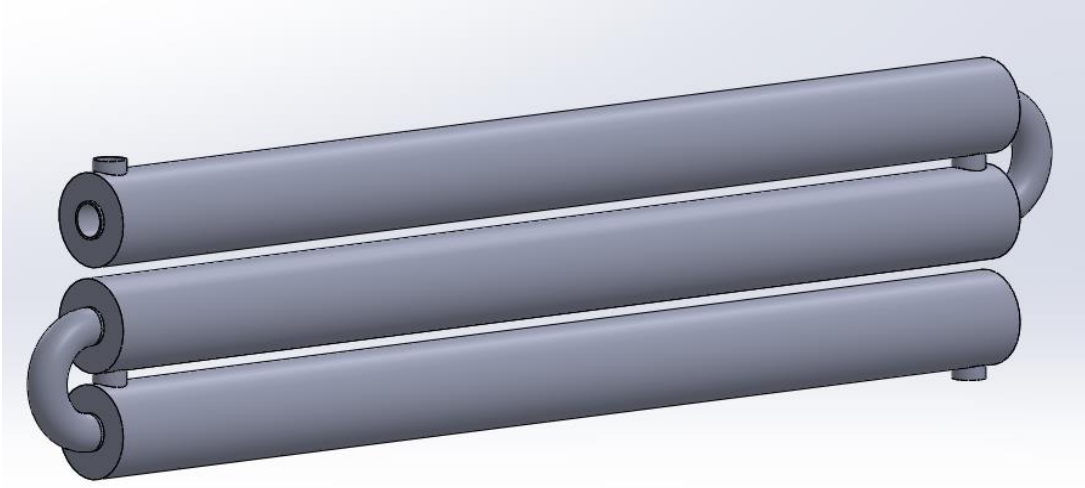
CAD Model of the concentric tube PCM heat storage setup
